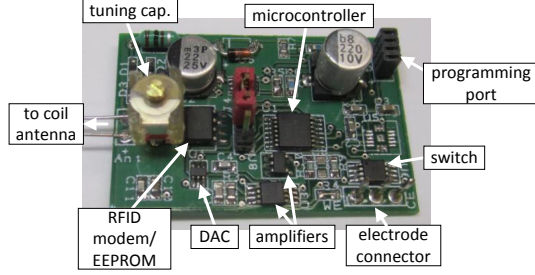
Populated printed circuit board of the corrosion sensor.
